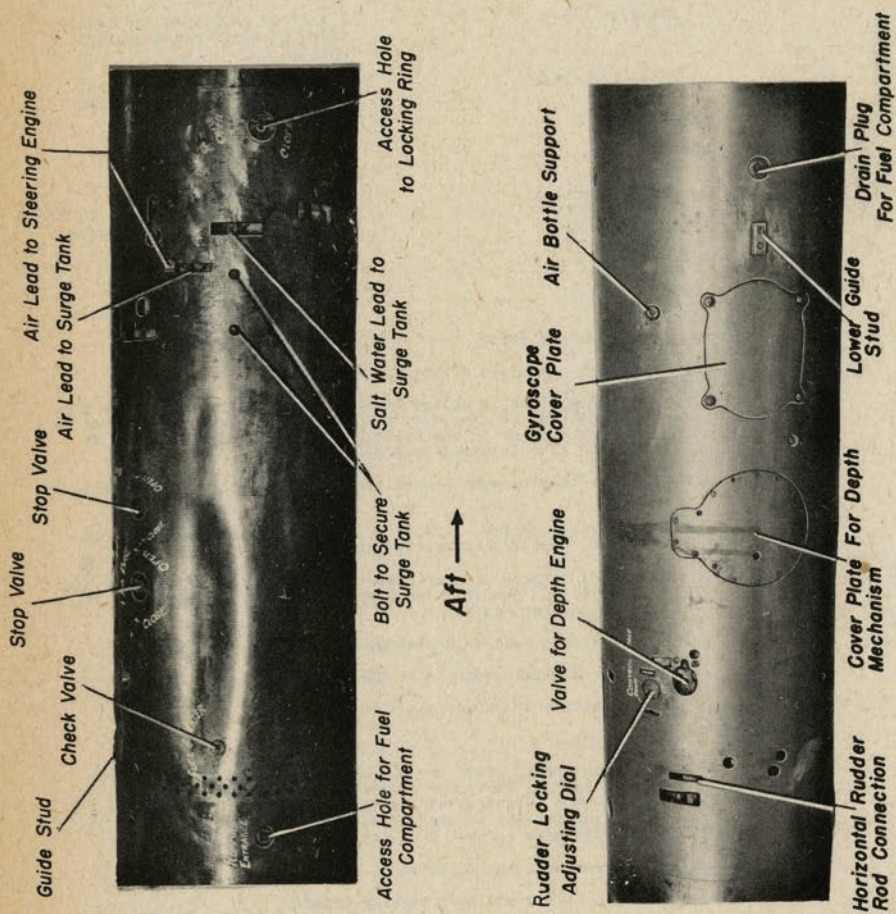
Torpedo Type 97, Flask Section, Port View
